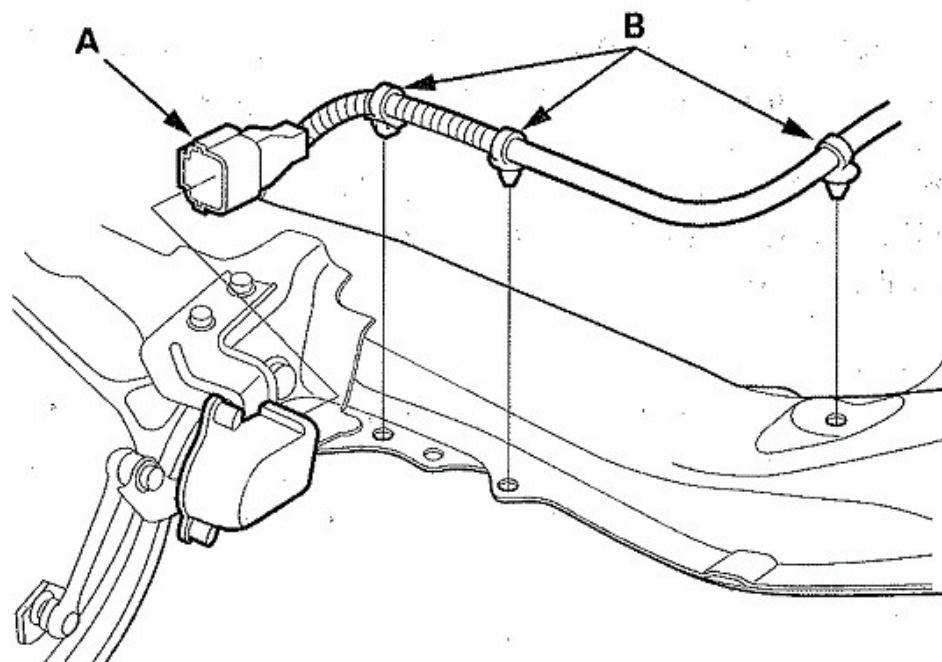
Identifying Front Suspension Stroke Sensor Connector And Harness Clamps
